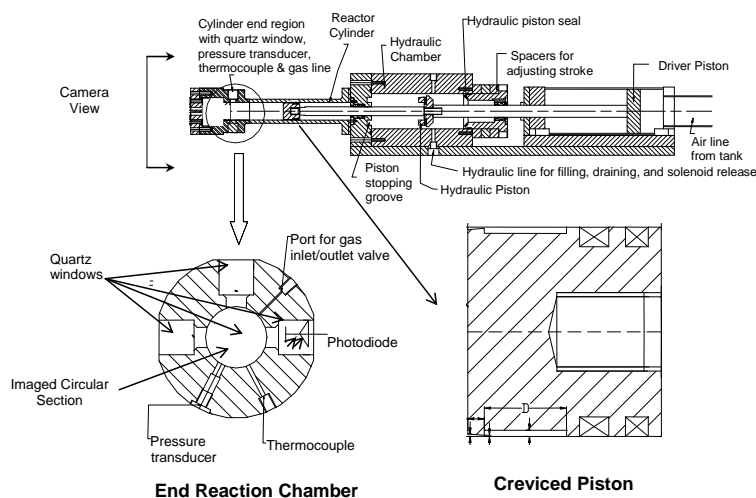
Schematic of the present rapid compression machine, the end reaction chamber, and the creviced piston head.
